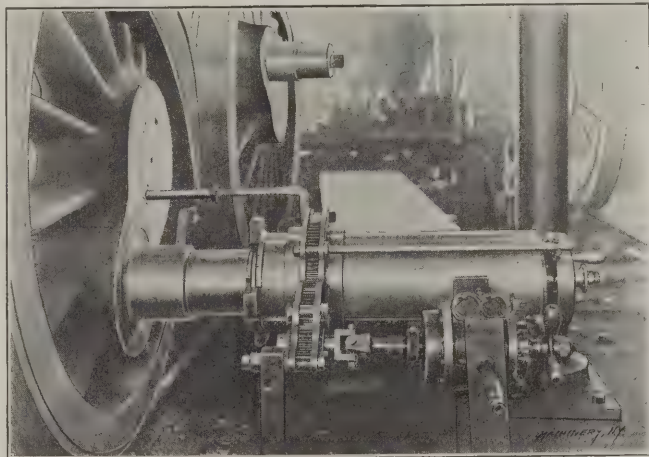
Westbrook Crank-pin Turning Machine, ready for Operation.
